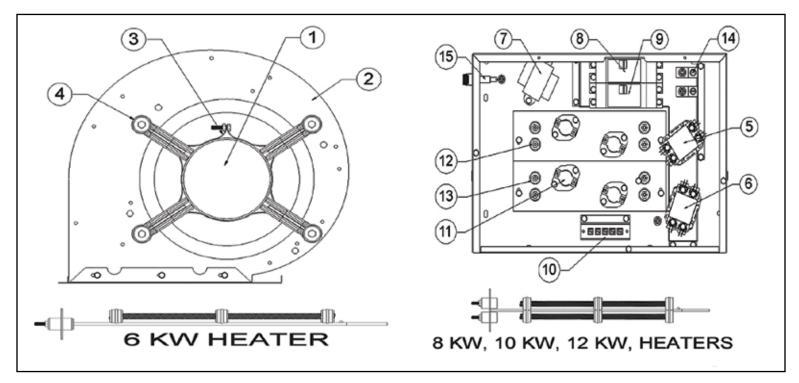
Replacement Parts Item Identification for Electric Heat Models with a 1/3 HP Constant Torque Blower Motor
